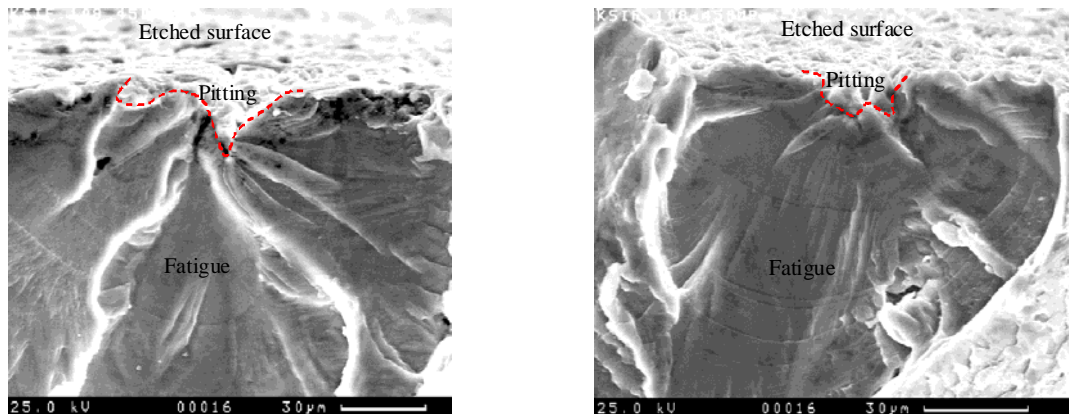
Two fatigue cracks that initiated from etch pits on coupons made from AA7050-T7451. Red outlines give the approximate interfaces between the flaws and the beginning of fatigue crack growth.
